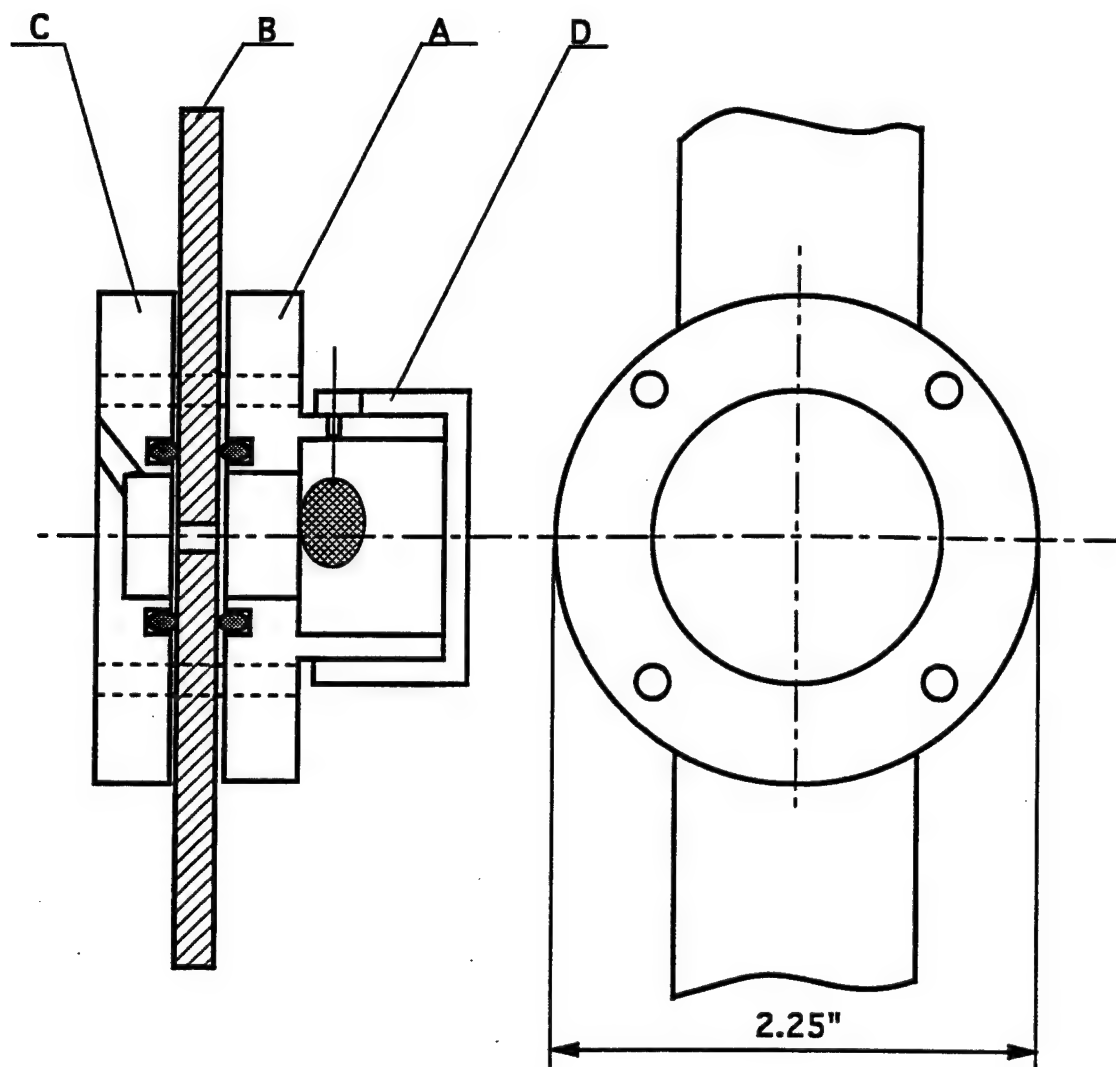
Schematic representation of an EFS prototype cell to accommodate a flat specimen with a center through hole
